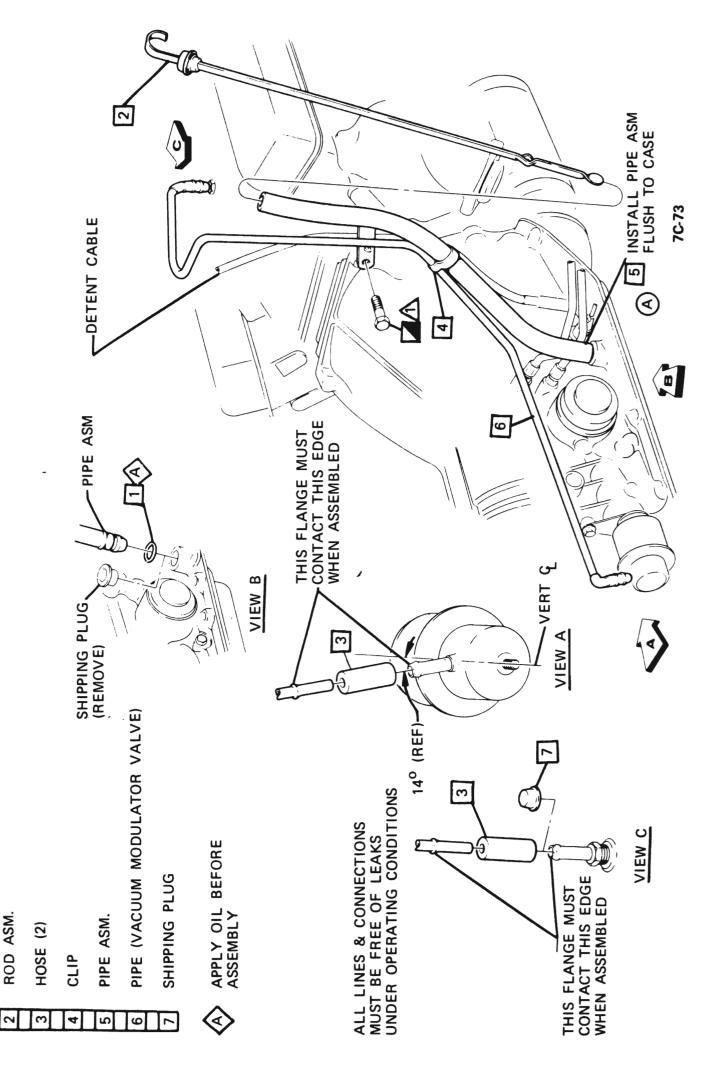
C-73 - Vacuum Line and Oil Filler Pipe
